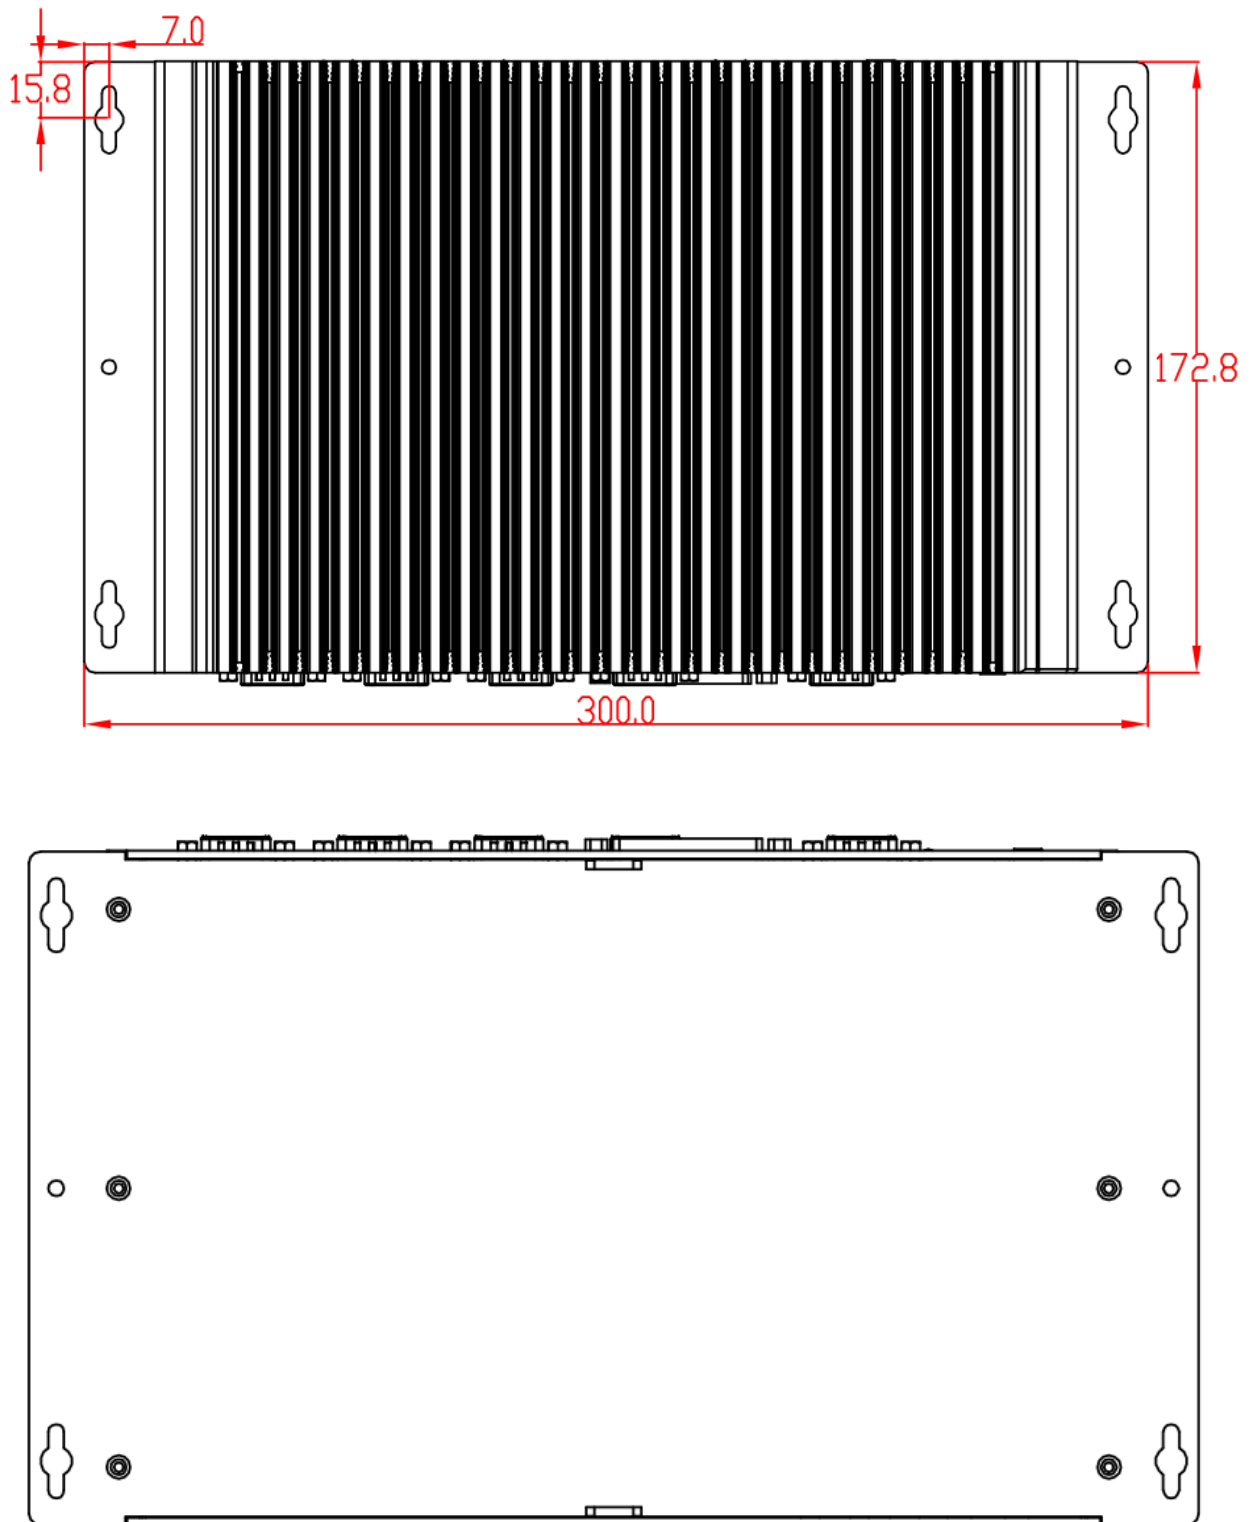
NIS-B988 Upper and lower cover mechanical dimension drawing
